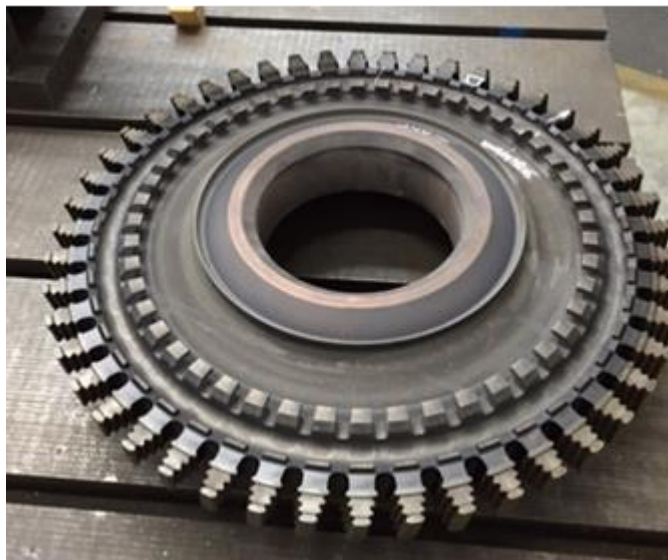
ONE OF TWO PW2037 HPT DISKS PROVIDED FOR SIR INSPECTION
